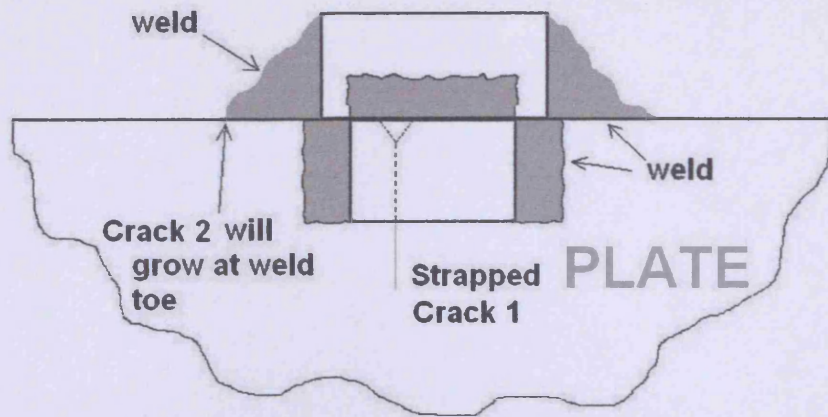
Three mild steel straps welded to stop the first crack from growing before starting to grow a second crack at the weld toe.
